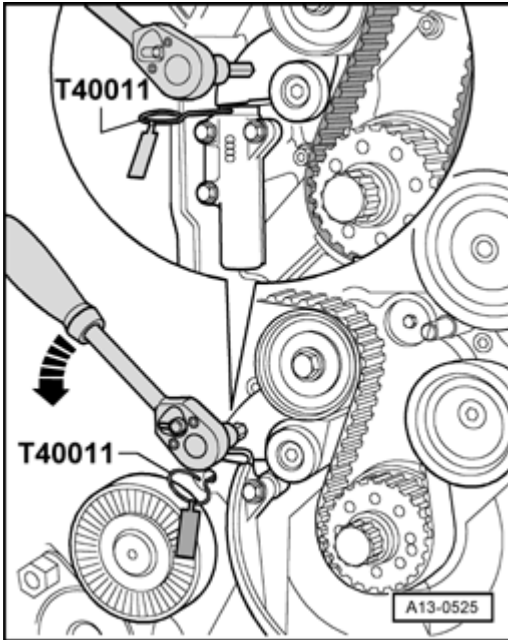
Using Hex Socket Wrench To Turn Toothed Belt Tensioner
